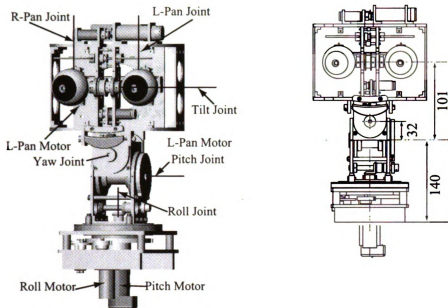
CAD drawing of the neck and head module. The unit is in mm.
